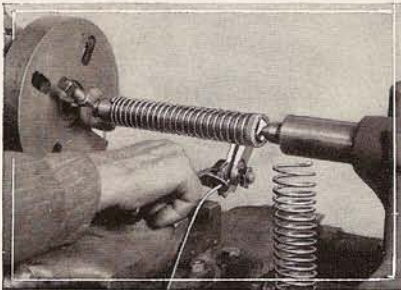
Winding a Valve Spring in the Lathe Using a Spring Winding Attachment. Attachment makes springs from wire 0" to 3/16" diam. Cat. No. 367. Code "Balun" \$2.50
